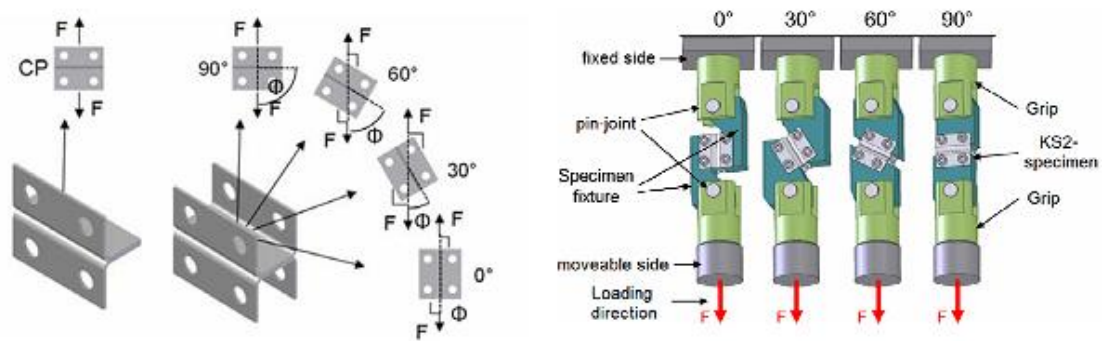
Clamping conditions for KS2-coupons with different loading angles [3]
